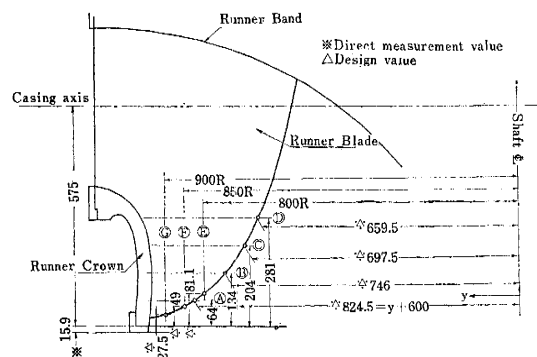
(b) Radial section of Runner blade showing details locations of vertical and cylindrical sections for photogrammetric measurements.
